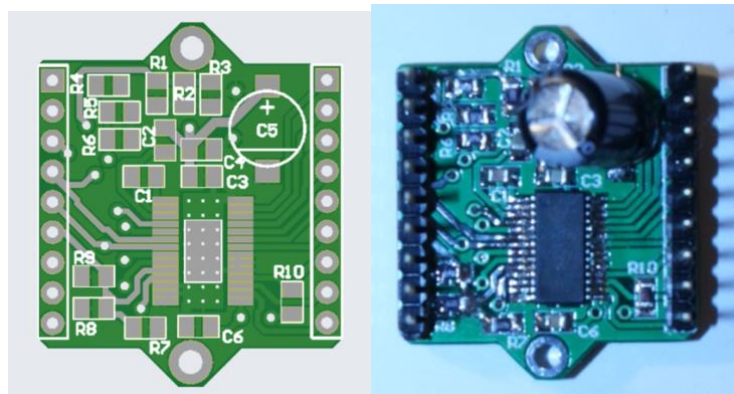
DRV8313* breakout board (top-view). Left: PCB layout. Right: Manufactured PCB with soldered components.
